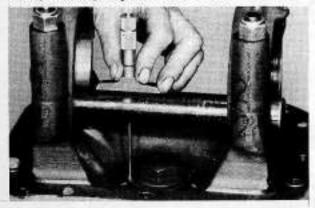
View showing proper depth gage and pilot shaft placement used in determining pinion shaft protrusion.
